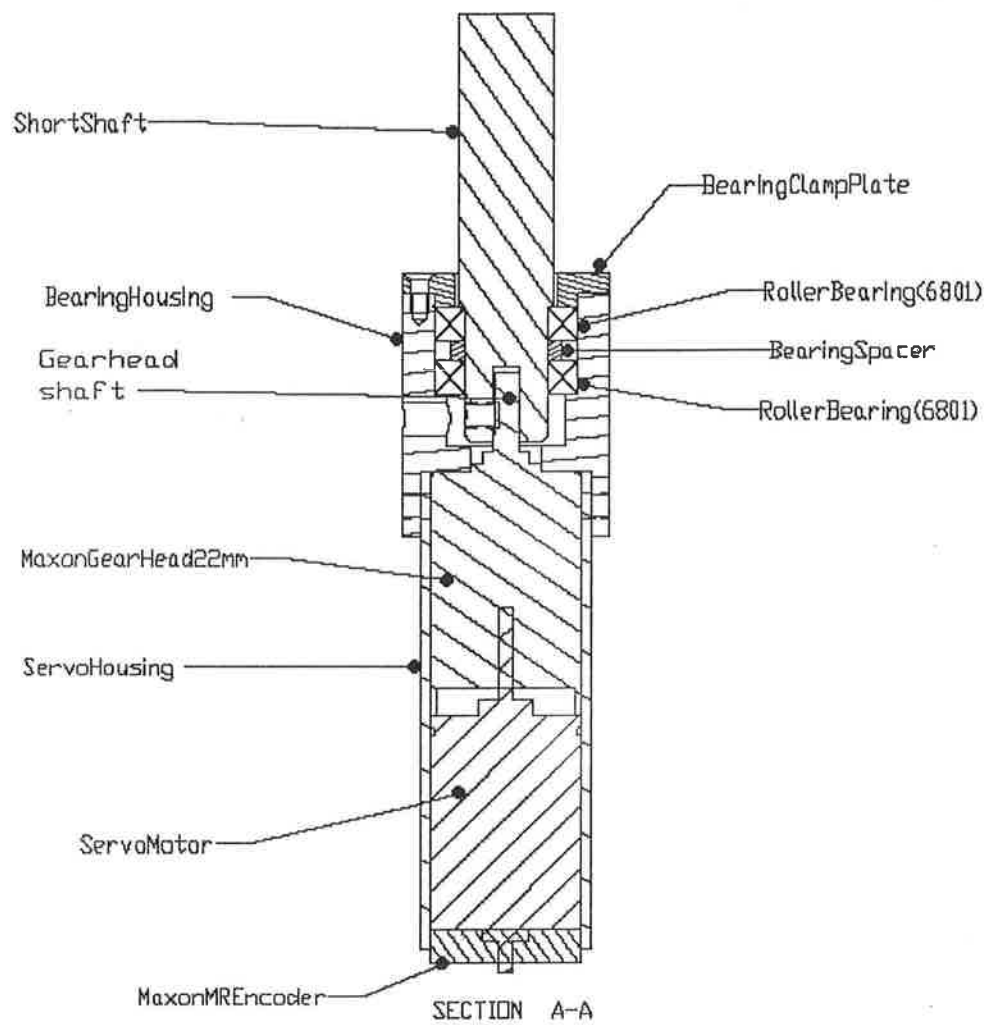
Section of revolute axis actuator, shaft and bearing housing
